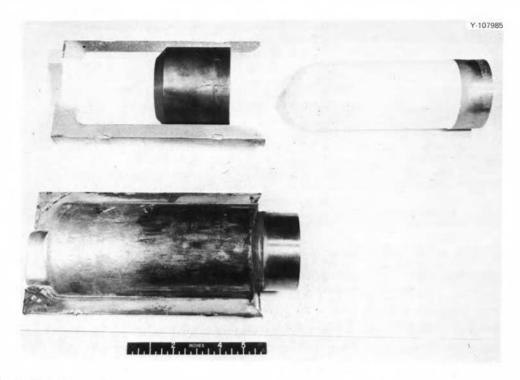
Zirconium oxide-coated back-extrusion tooling with molybdenum starting blank and as-extruded pot half section.
